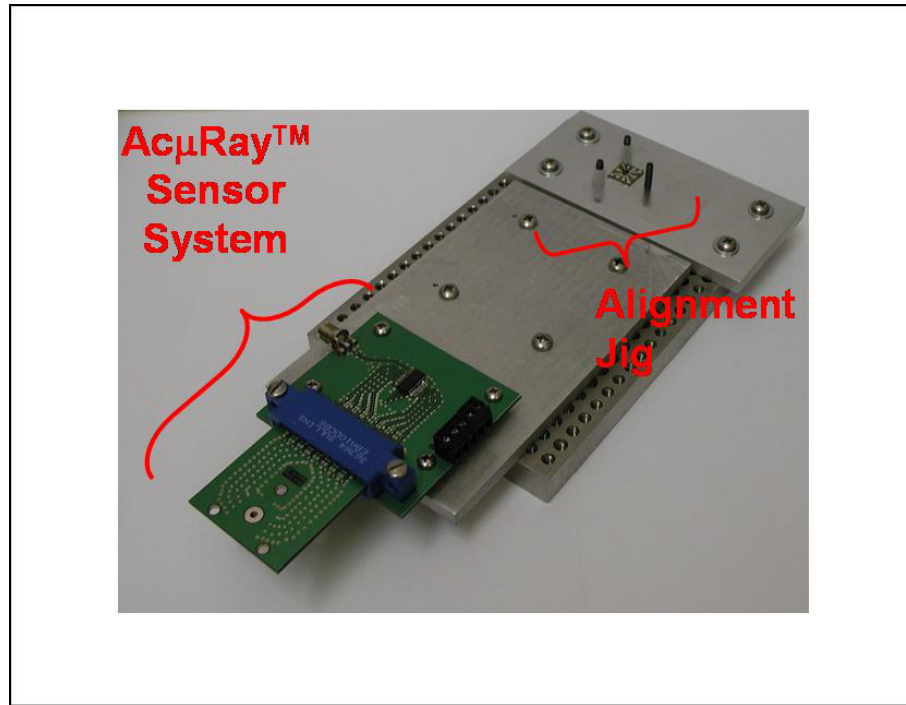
AcμRay™ sensor system, including alignment jig for loading sensor chips onto disposable sensor array board.
